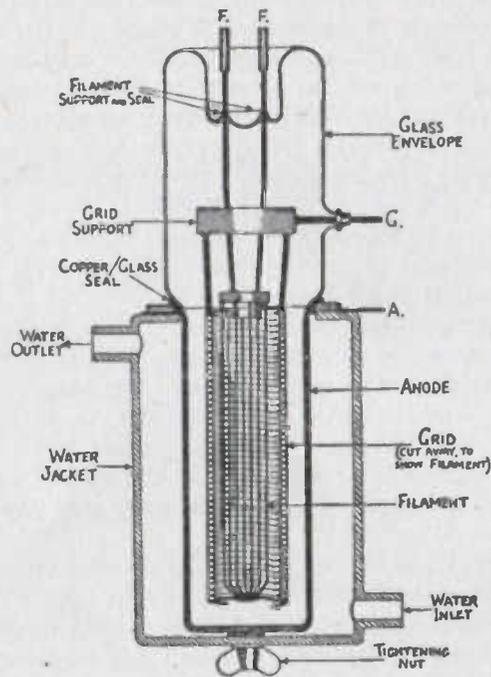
SECTION OF A LARGE WATER-COOLED VALVE, SHOWING ESSENTIAL PARTS
